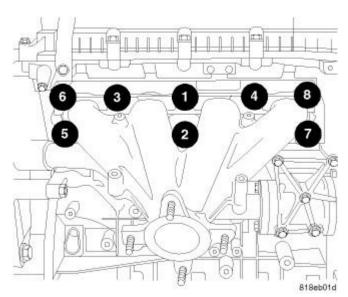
Exhaust Manifold Support Bracket & Bolts Courtesy of CHRYSLER GROUP, LLC
